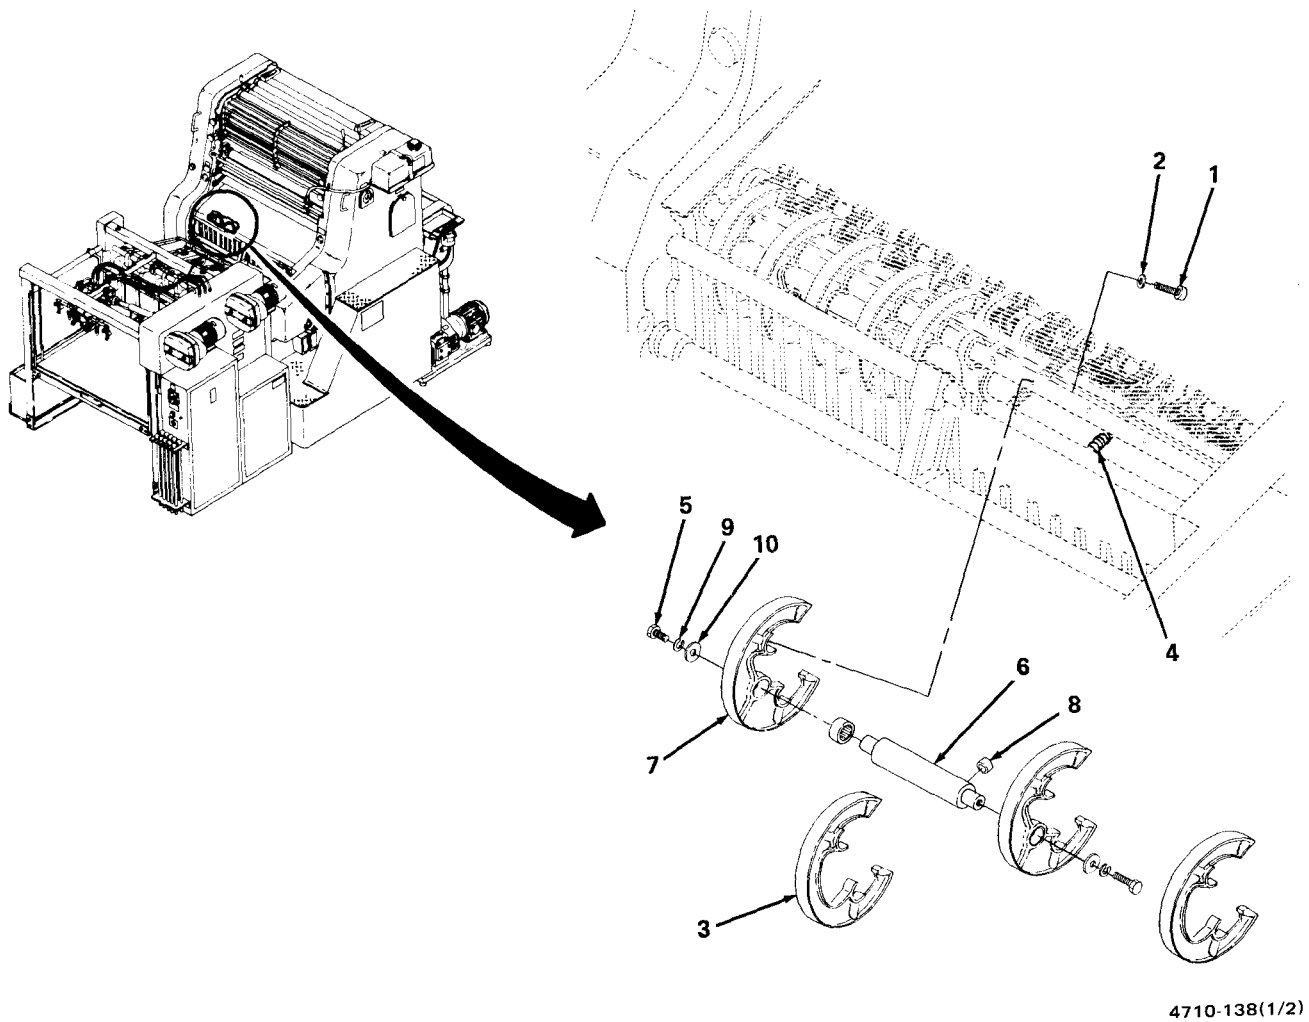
Ranger Drum Sheet Segment Disassembly.
